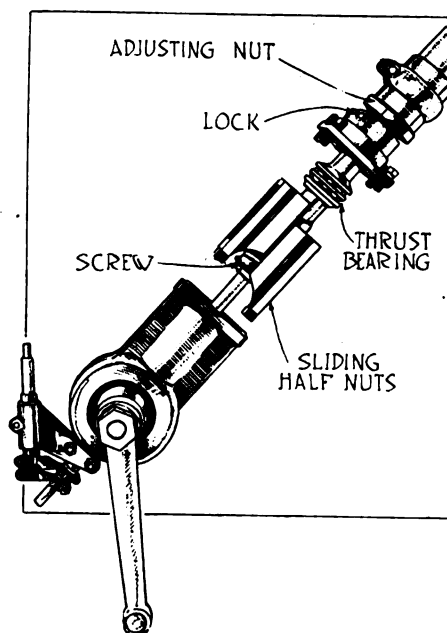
Method of assembling the steering gear, showing the correct position of the sliding half nuts
